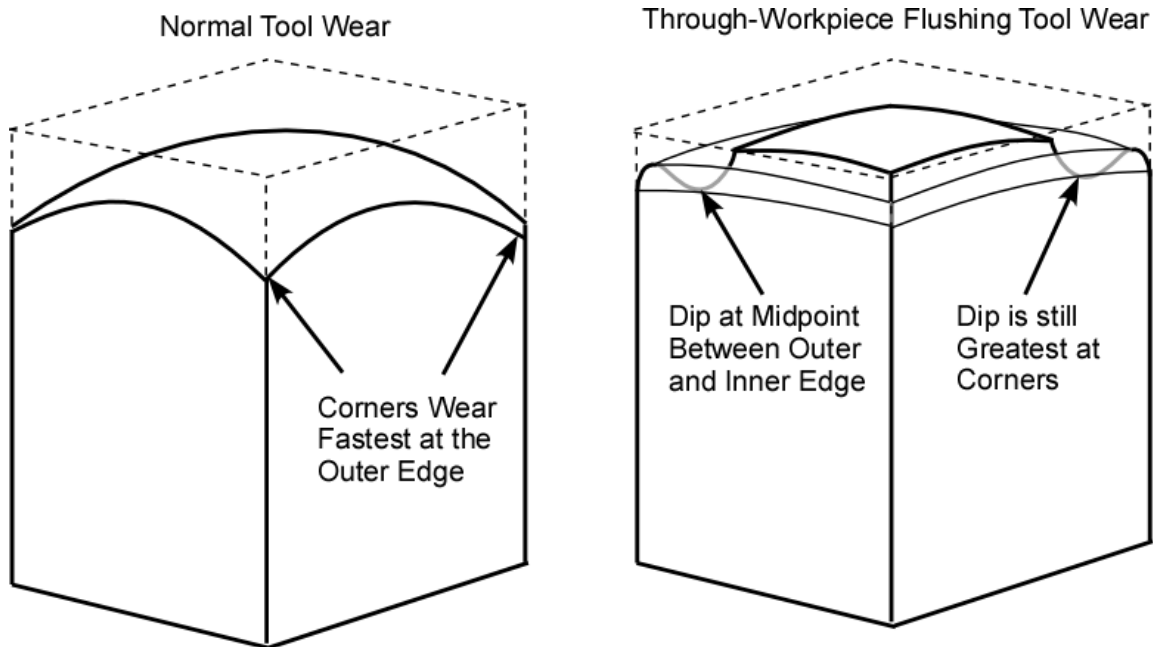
Tool wear for a normal tool is greatest at the edges of the feature at the corners. The through-workpiece finishing tool had a different pattern with a dip between the outer and inner edges of the machining area. The dip was largest at the corners.
